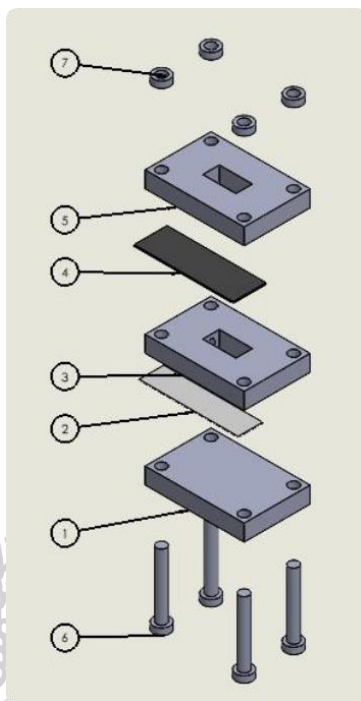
Exploded-view schematic of the zinc–air battery housing structure and assembly sequence.
